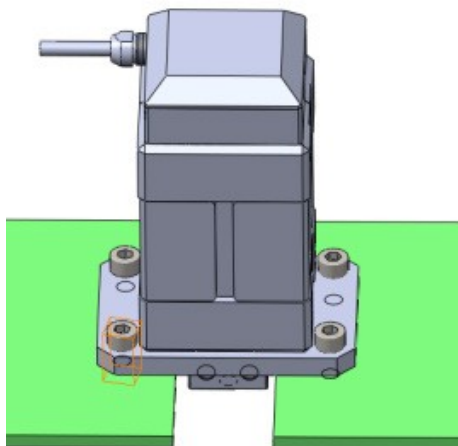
Example of mounting using the mounting flange B (spatial view)
